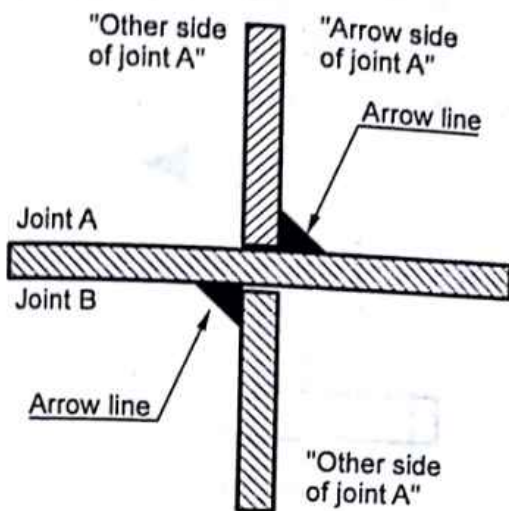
Cruciform joint with two fillet welds
